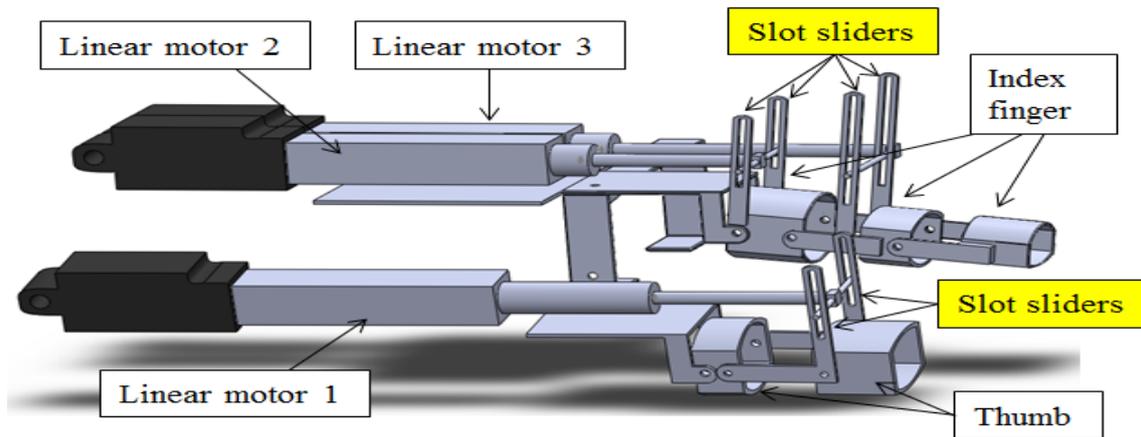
The assembly drawing of the hand exoskeleton.
